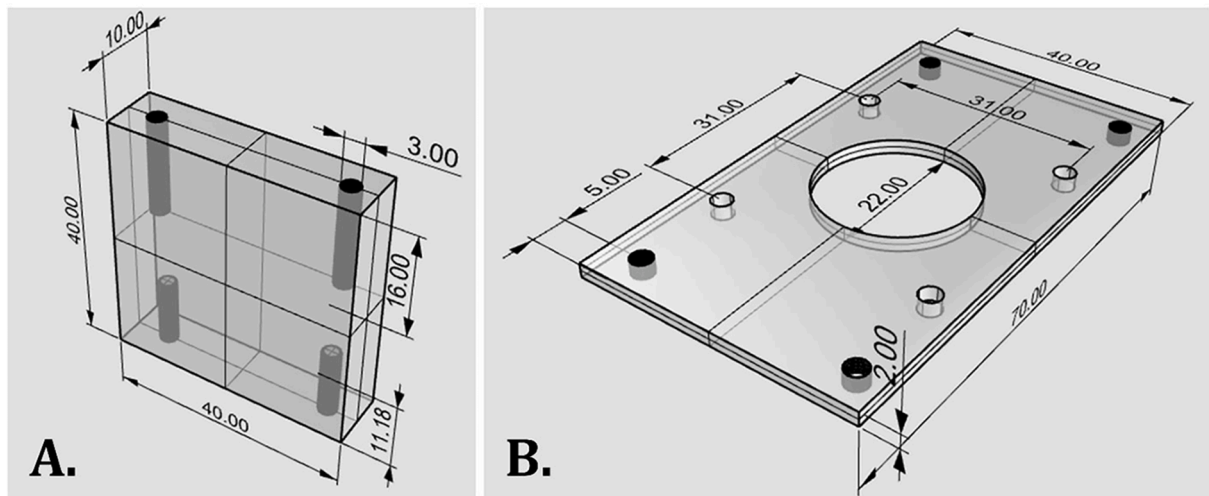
Pieces for the attachment of the rack actuating motor to the horizontal base. A) vertical plates 4; B) motor holder plate 5.
